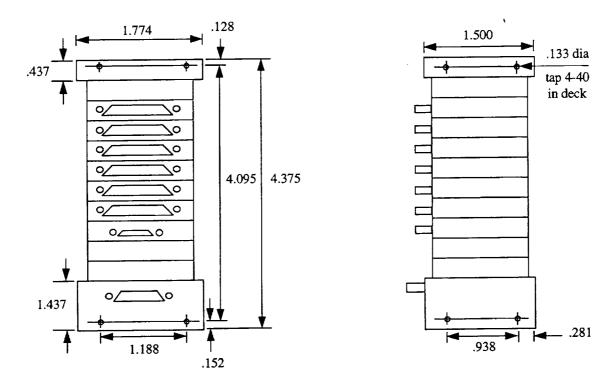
Exploded view of MMP-900 PCM encoder system.1
